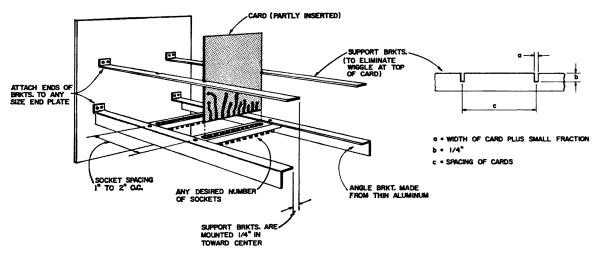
Construction of a card frame to hold surplus computer cards and connectors. Although provision for only two cards is shown in this drawing, almost any practical number of cards may be held in one frame.
